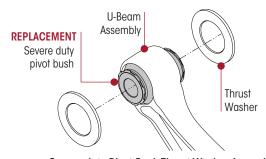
Severe-duty Pivot Bush Thrust Washer Assembly
